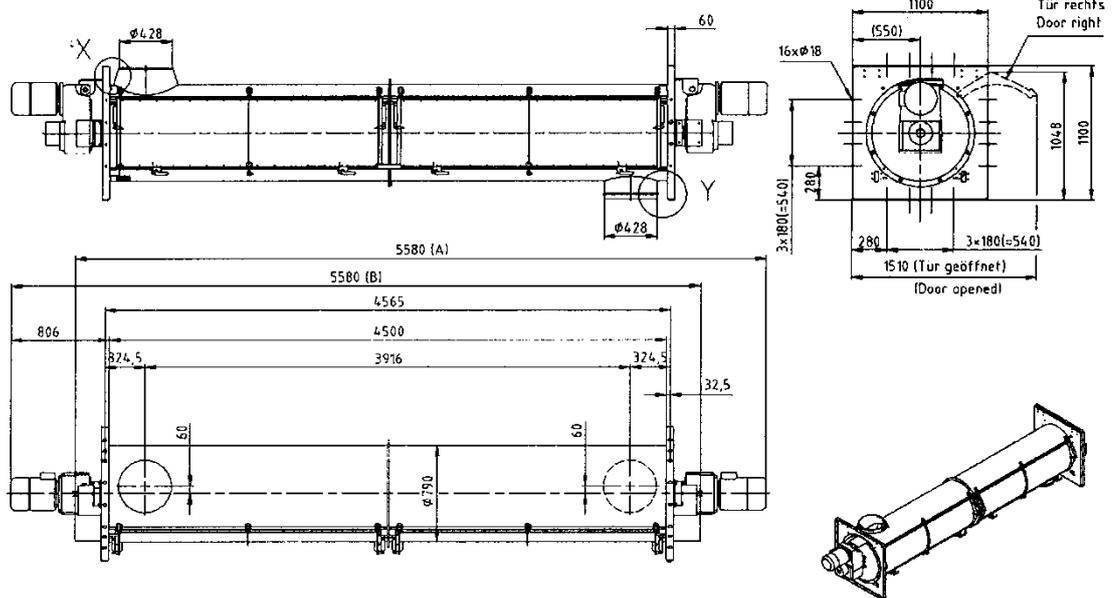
Dimensioned drawing Retentioner 2000 right
